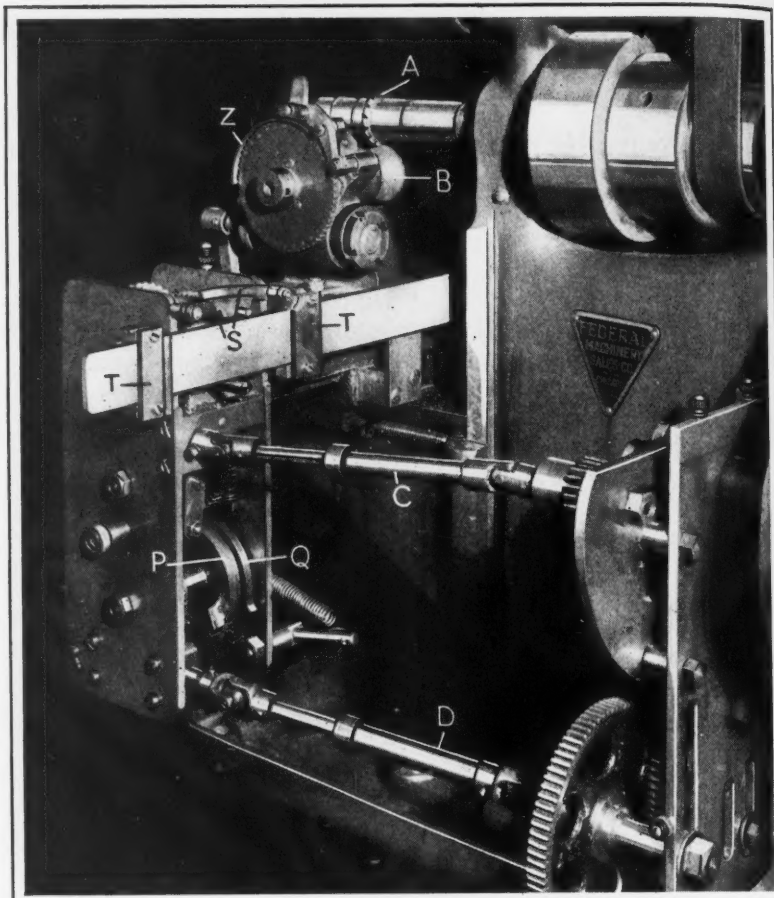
Another View of Gear-cutting Equipment, Showing Change-gears and Separate Drives for the Table and Indexing Movements
